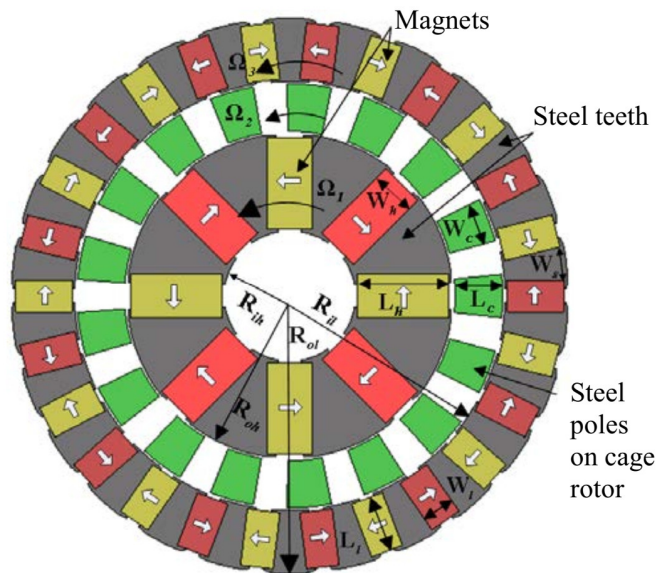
The spoke-type inner rotor coaxial radial field magnetic gear proposed in [29].
